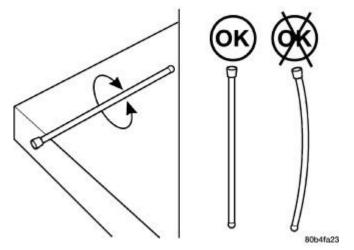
Inspecting Push Rod For Cracks Courtesy of CHRYSLER GROUP, LLC
